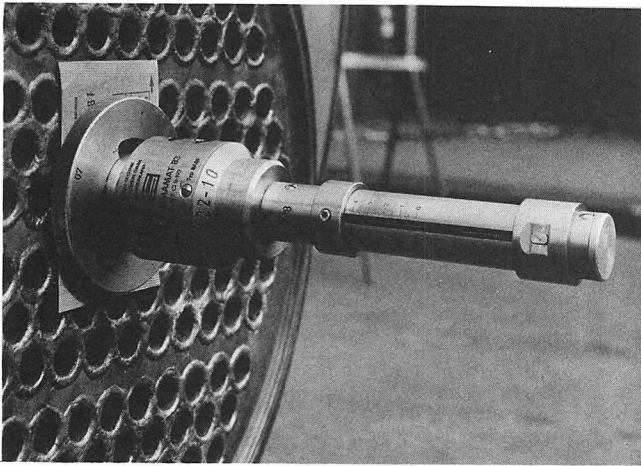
Radiography of tube-to-tubesheet welds by means of isotope, Ir 192, by which welding defects (especially pores) can be detected during manufacture.
